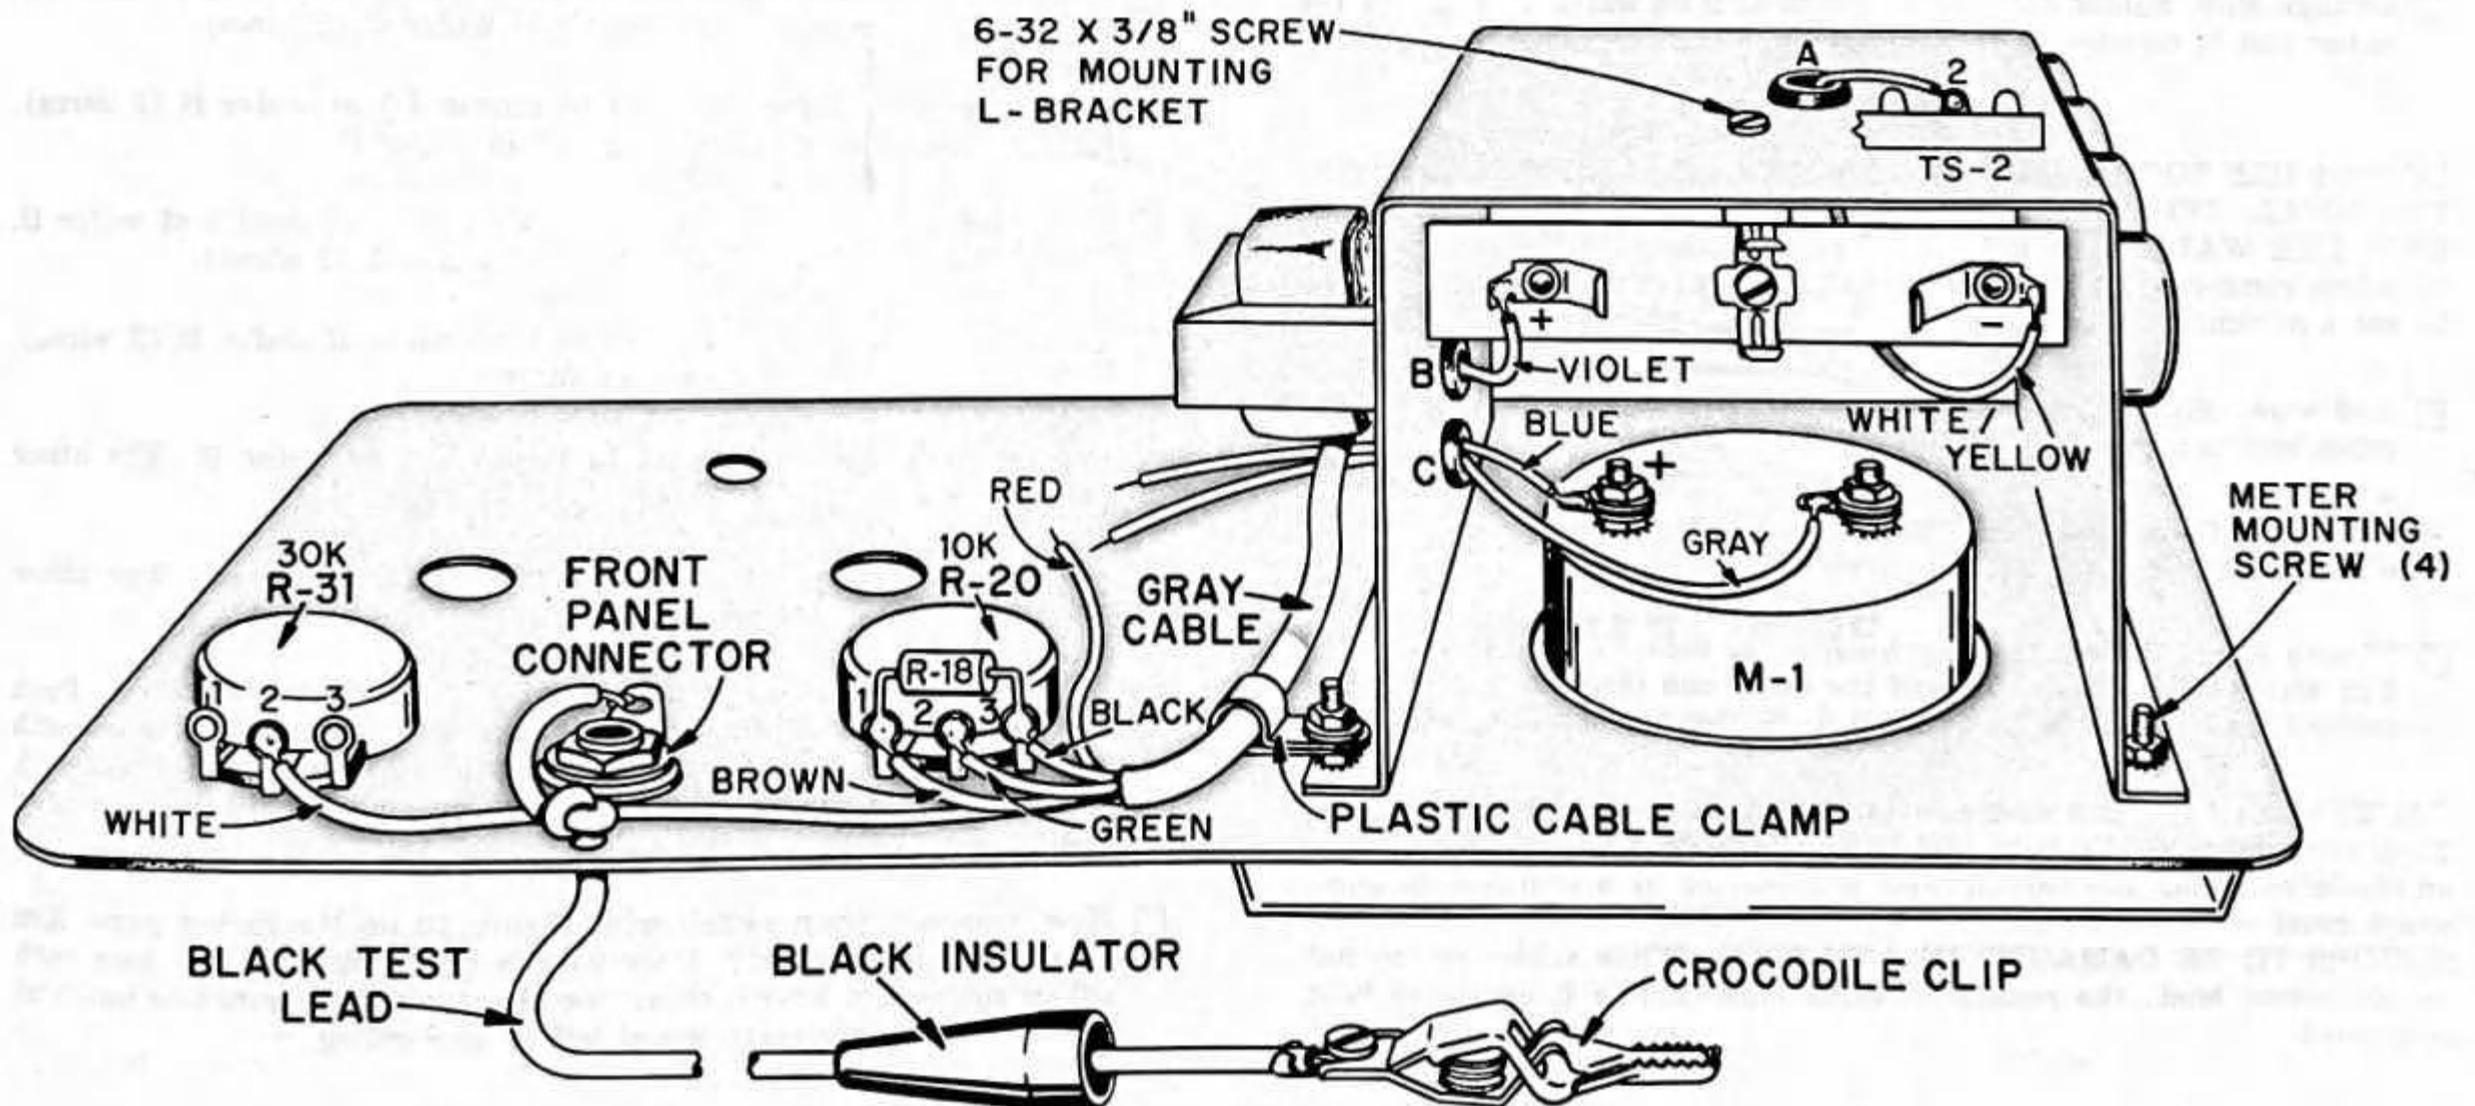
MOUNTING PARTS ON THE FRONT PANEL
